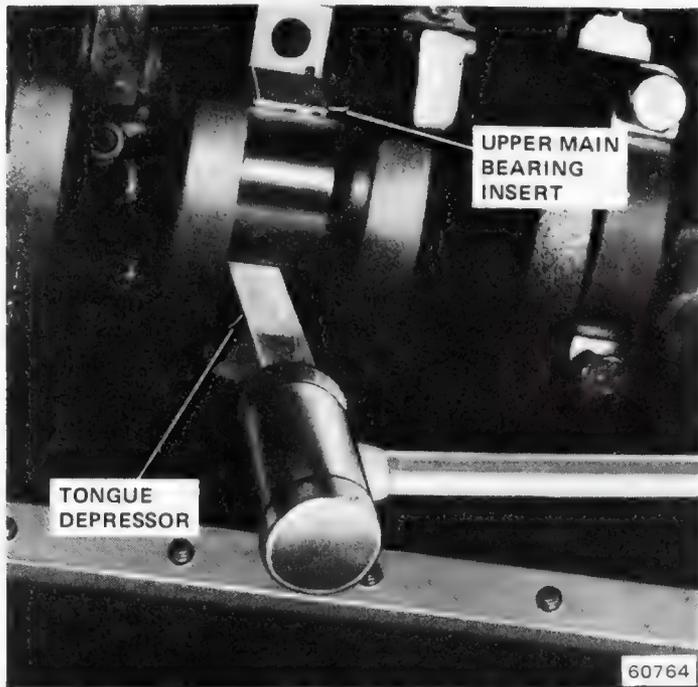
B-60 Removing No. 3 Main Bearing Insert
